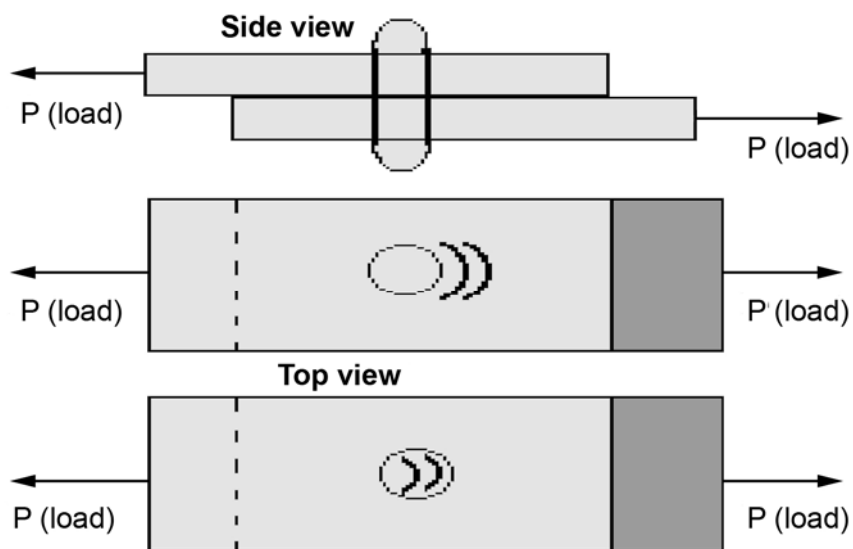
Illustration showing top plate being pulled into rivet and exerting compression on rivet [87].
